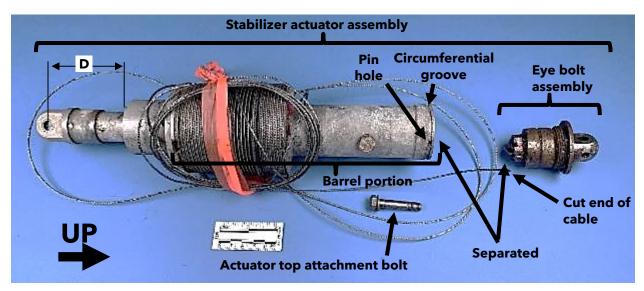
As-received horizontal stabilizer trim actuator assembly with the separated eye bolt assembly and actuator top attachment bolt. The eye bolt assembly is also referred to in the maintenance manual as the top eye end and bearing assembly.
